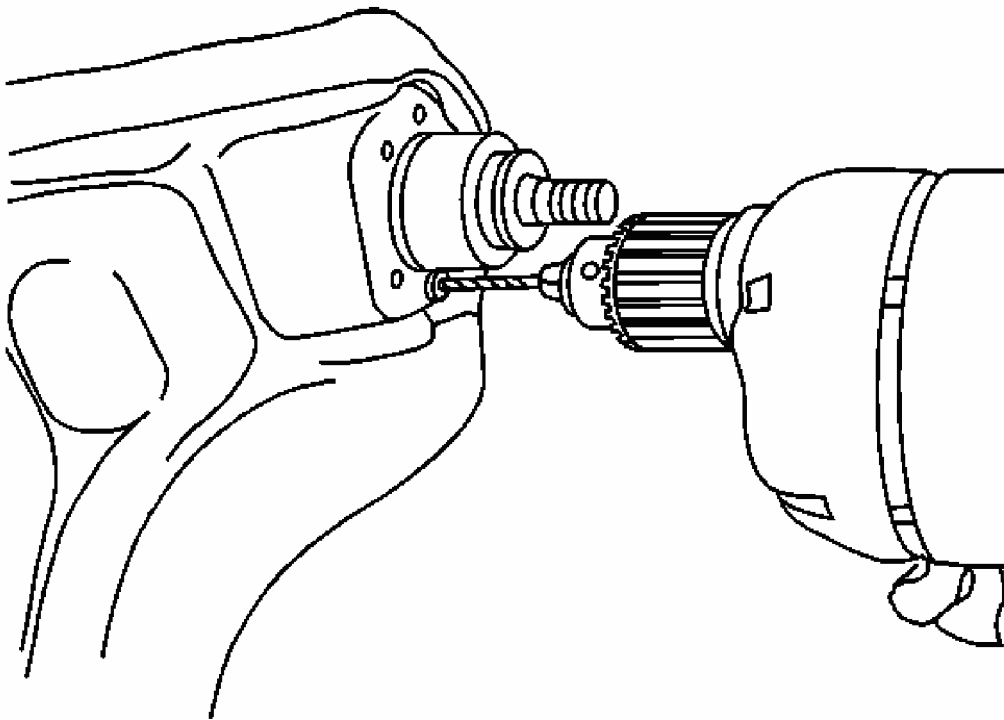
Drill The Rivet Heads Away Using A 12.7 Mm (1/2 In) Drill
